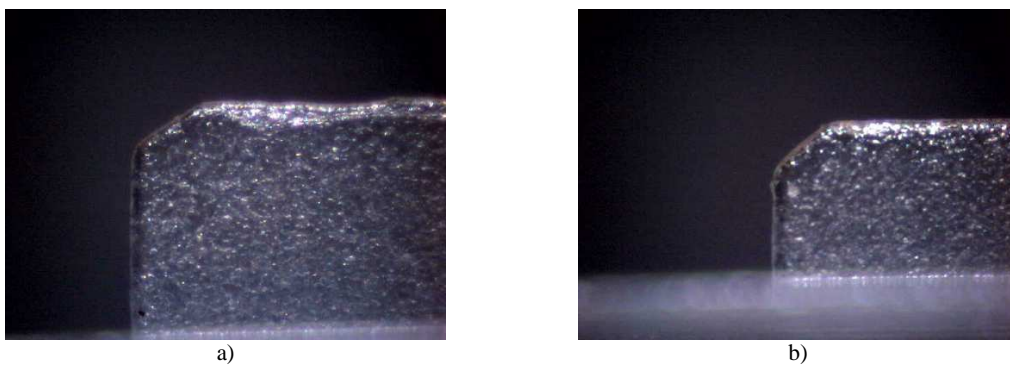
Rib analysis of the PP parts moulded on the MS01 moulding block
